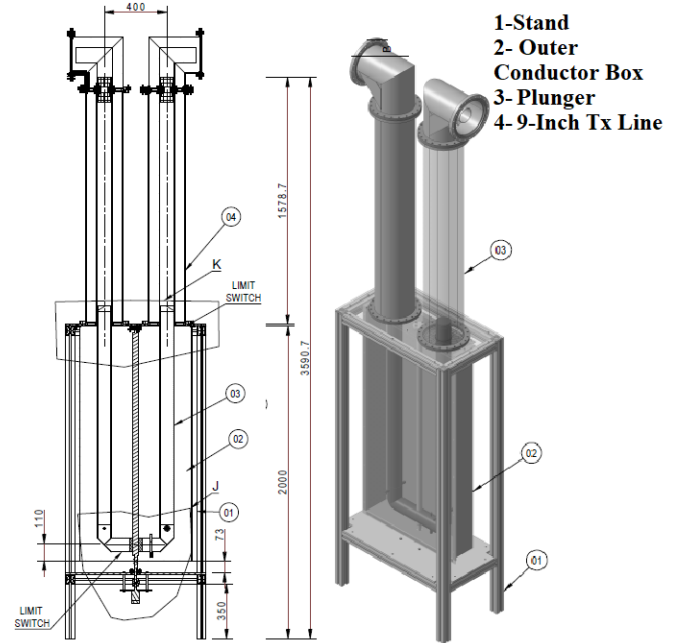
Assembly Drawing of Transmission line Phase Shifter.
